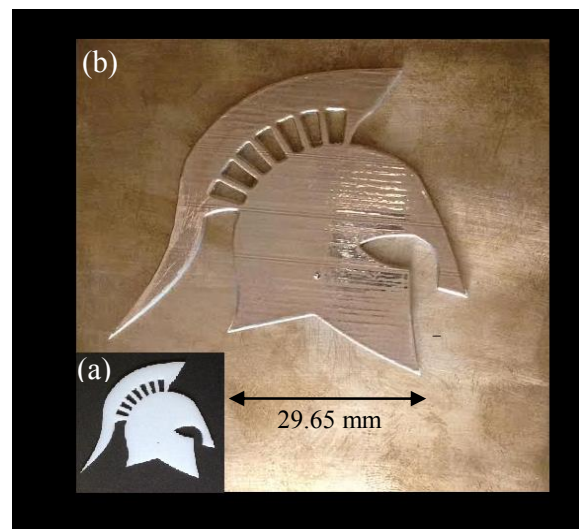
3D printed Spartan Helmet logo (a) before metallization and (b) after metallization and assembly.
